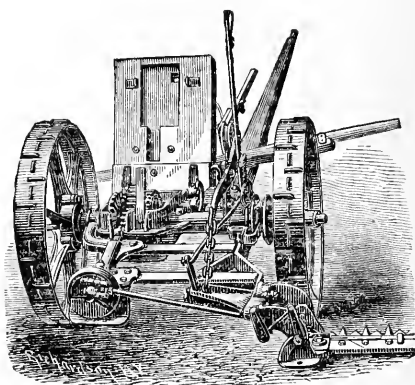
Wheeler Mower No. 6, with Cover Raised to Show Gearing.
